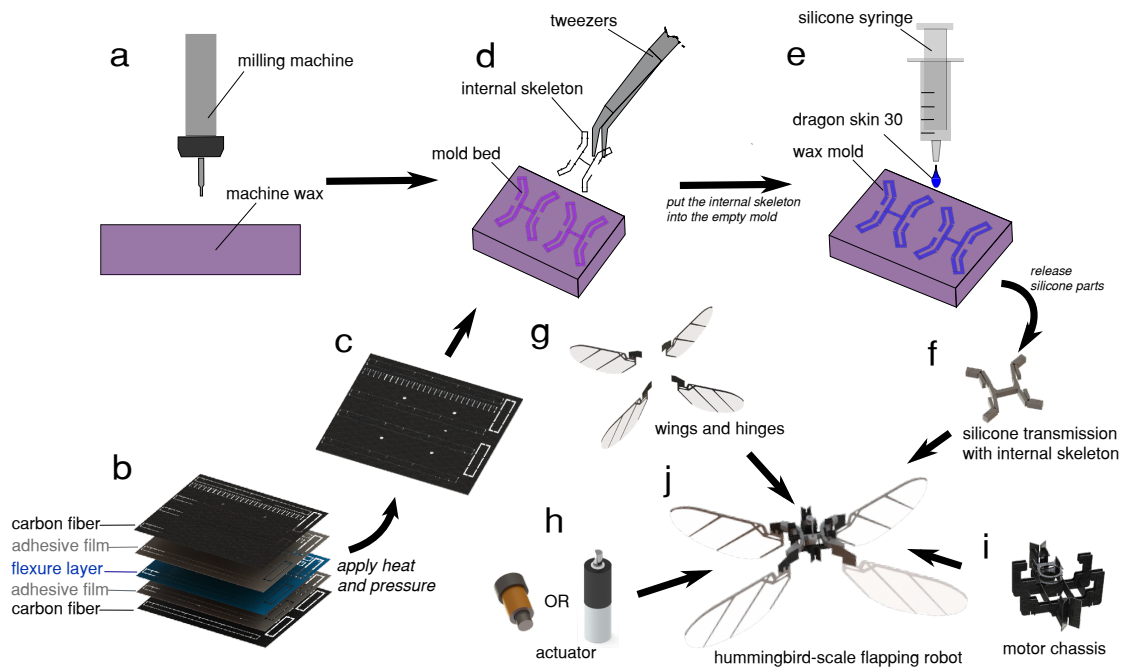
Overview of the manufacturing process. (a) The wax mold for the compliant transmission was machined using a 1/32" flat end mill in an Othermill micro-milling machine. (b) The skeleton of the transmission is a laminate constructed from a 5-layer stack of CF, adhesive, and thin, flexible polymer (c) We apply heat and pressure to fuse the laminate, pop out the skeleton, and fold it into the proper shape. (d) The CF internal skeleton was placed into the mold bed, held in place by small horizontal tabs to prevent misalignment. (e) Mold was filled with silicone (Dragon Skin 30, Smooth-On) using a syringe to ensure an even fill. After setting completely, the compliant transmission (f) was assembled with the wings (g), actuator (h), and motor chassis (i) into the completed FWMAV (j).
